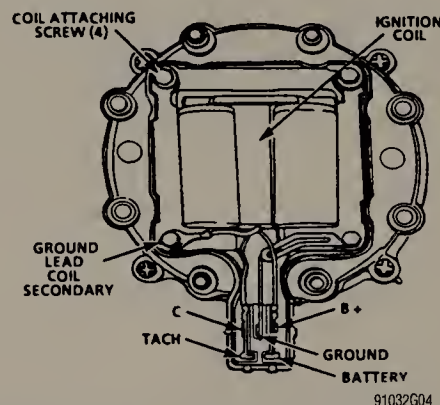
The ignition coil is secured to the distributor cap with 4 screws
